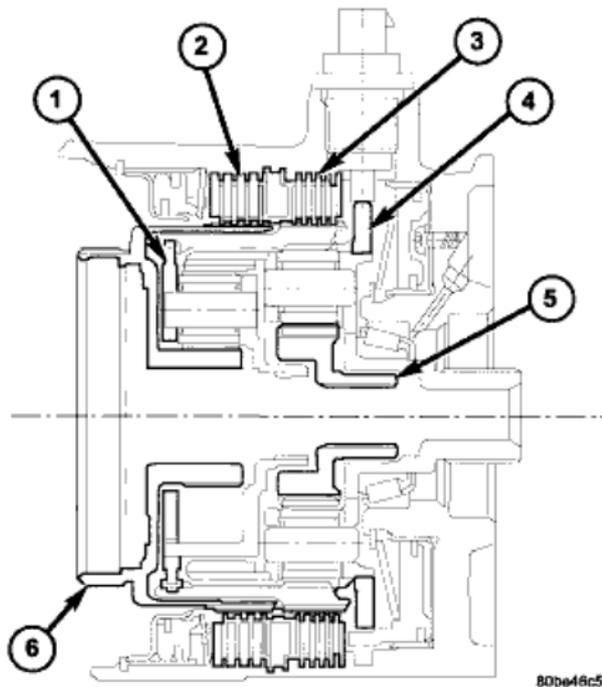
Identifying 2/4 & Low/Reverse Clutches & Planetary Geartrain Components
